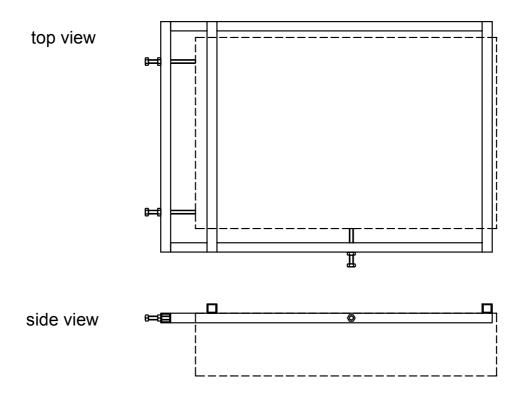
Frame to support the vacuum sowing mould, to be placed on top of a soil bin (dashed).
